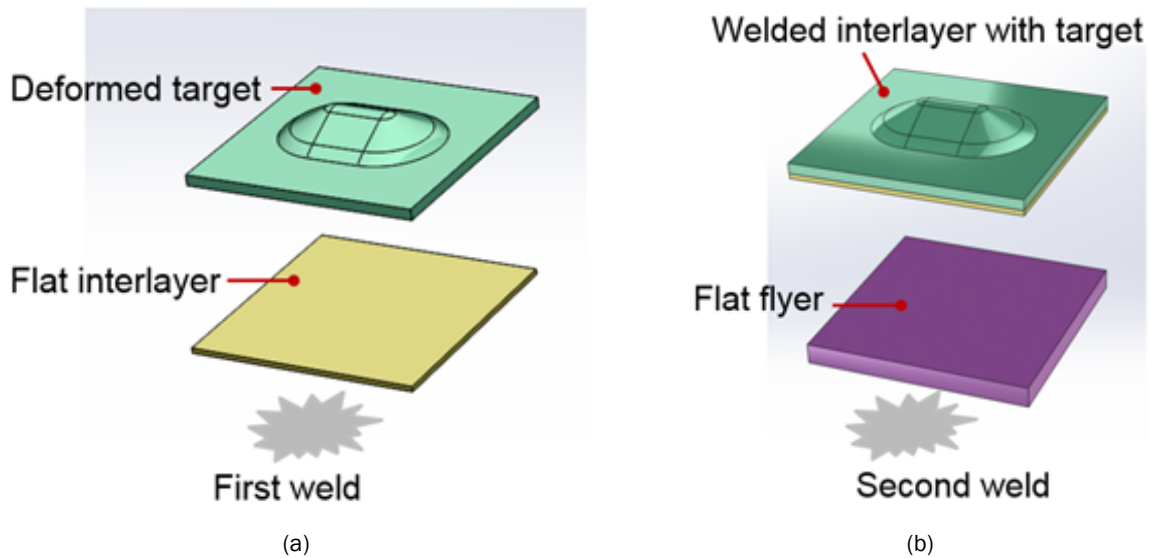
Illustrations of the two-shot VFAW showing: (a) the first shot welds the flat interlayer to the deformed target; and (b) the second shot welds the flyer to the welded flyer-target stack-up. Source: The Ohio State University.
